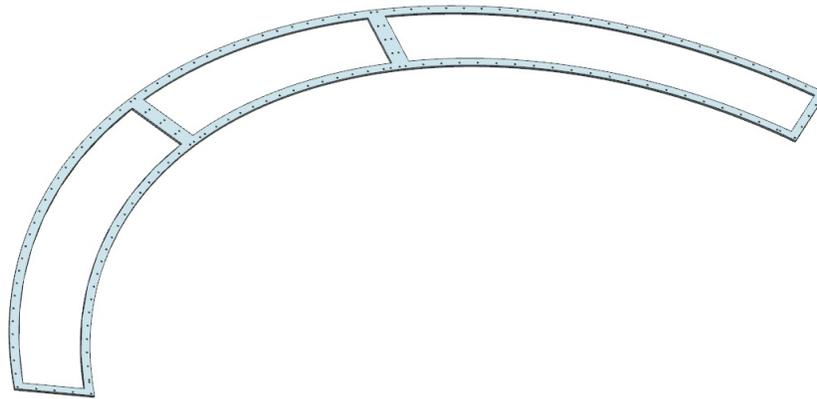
View of Top Inner Ring for Ring Manifold 2.5
